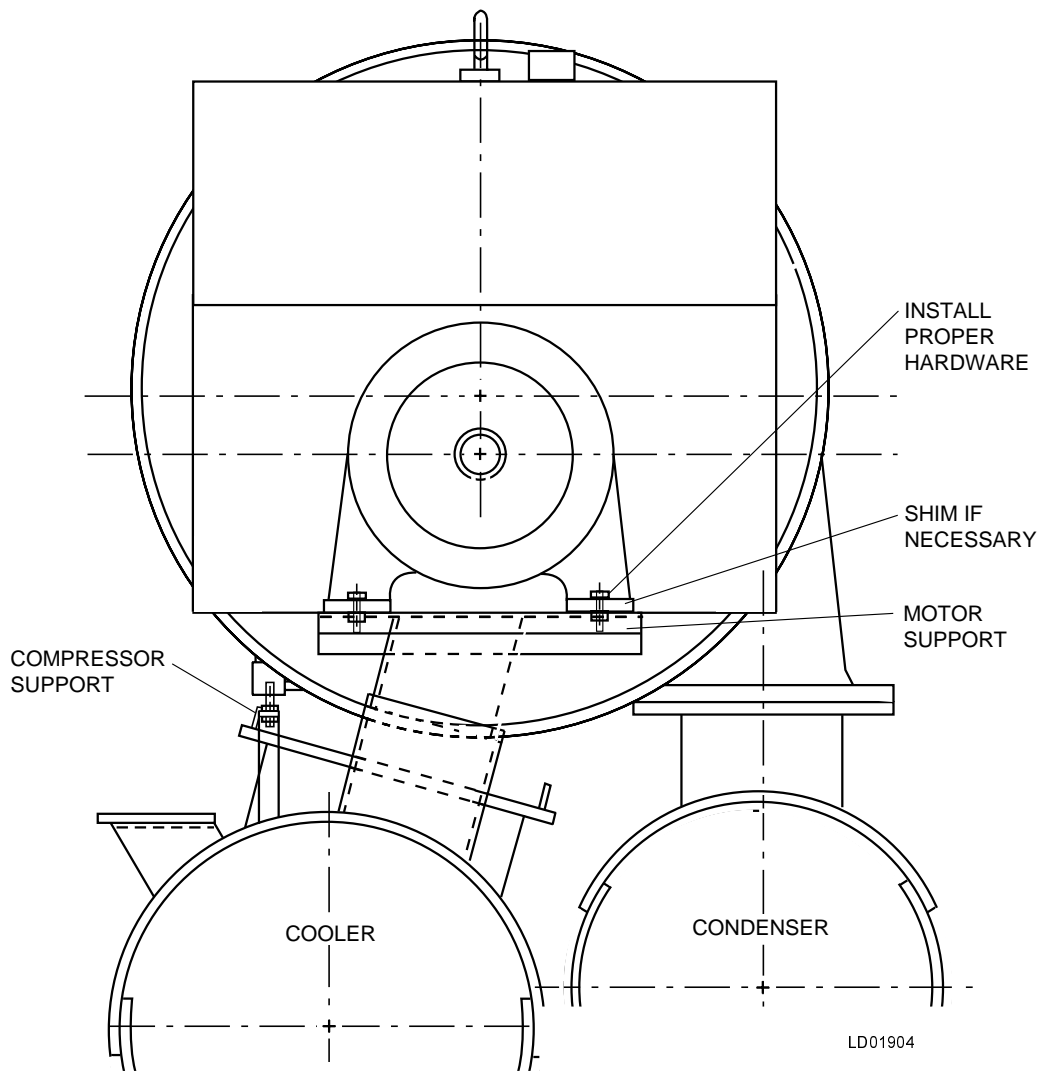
MOUNTING COMPRESSOR / MOTOR (F COMPRESSOR UNITS)
